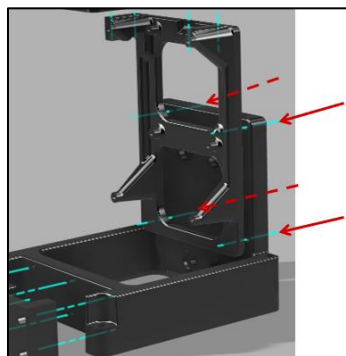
WSI: screw placement for motherboard holder and mainframe holder.
